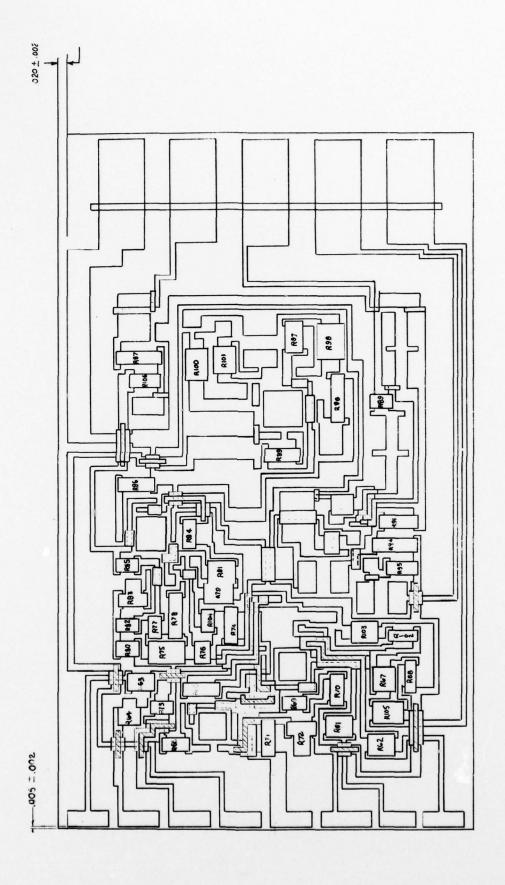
Substrate Component Assembly VCXO Hybrid Regulator Version
